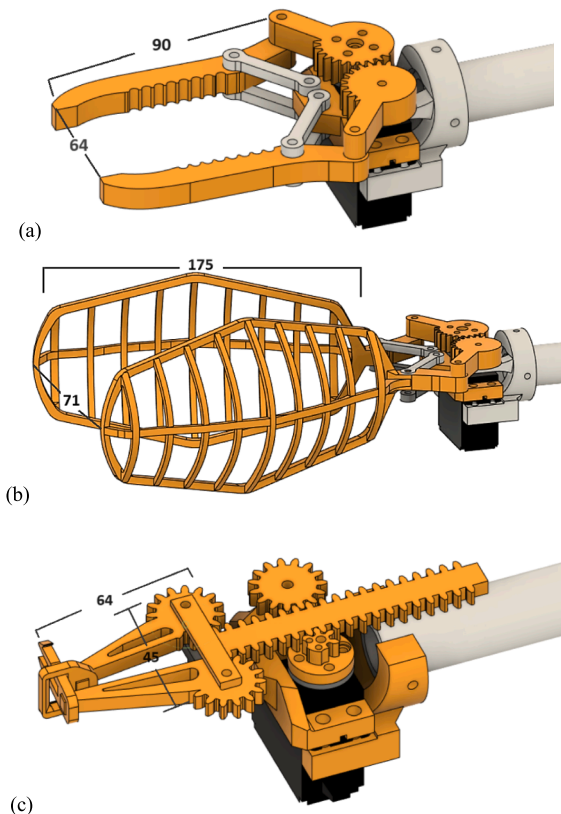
Tool manipulator attachments: (a) Object gripper tool, (b) Fish mort grabber tool, (c) Net tear repairing tool (sizes in mm).
